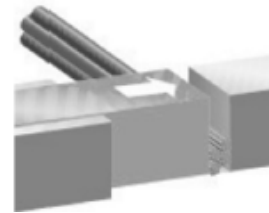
Schematic of wire positioning on ultrasonic welding equipment.
